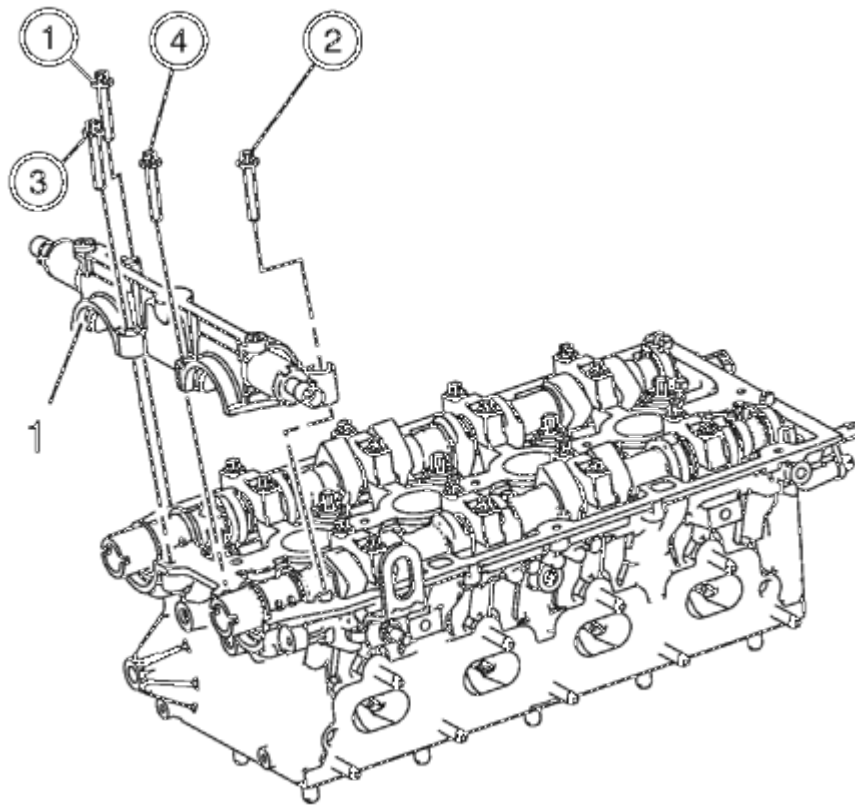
Camshaft Bearing Cap And Camshaft Bearing Cap Bolts Removal Sequence
